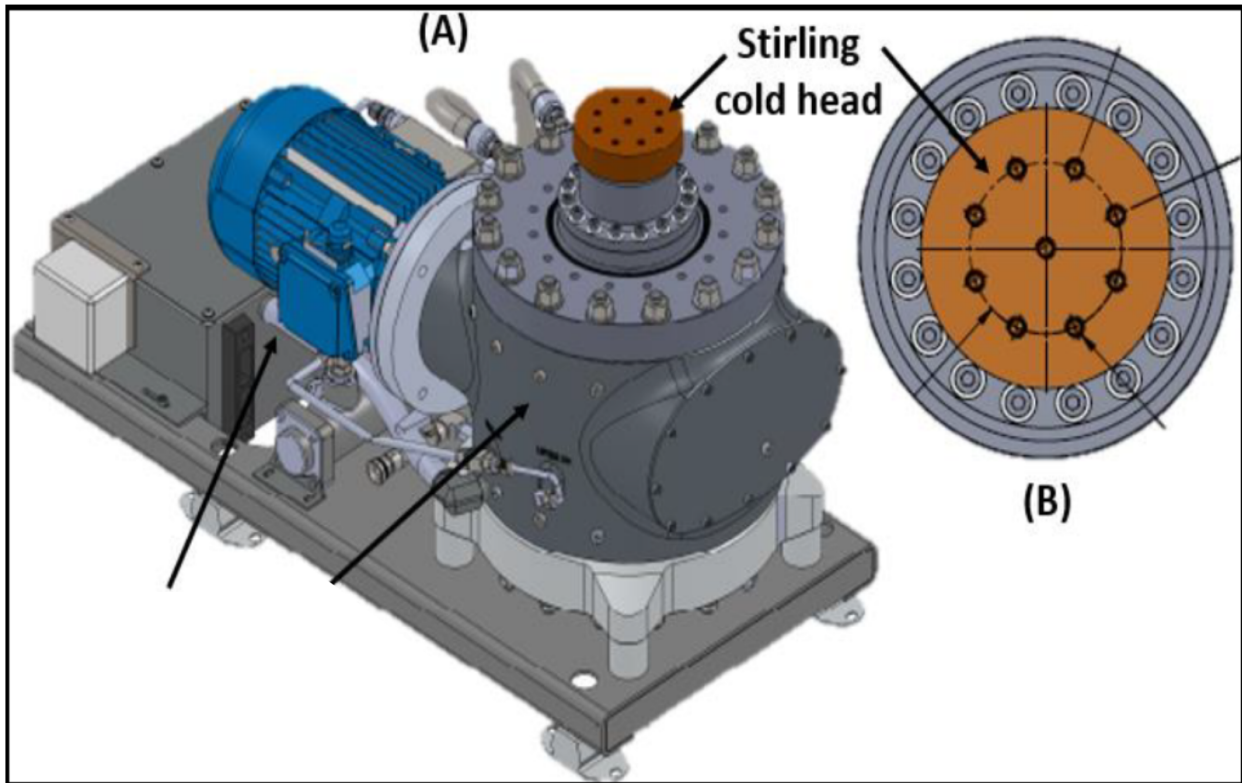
(A) Design of the AFCryo STC90 Cryocooler and Stirling Cold Head and (B) Overhead View of Stirling Cold Head (Meier et al., 2018)
